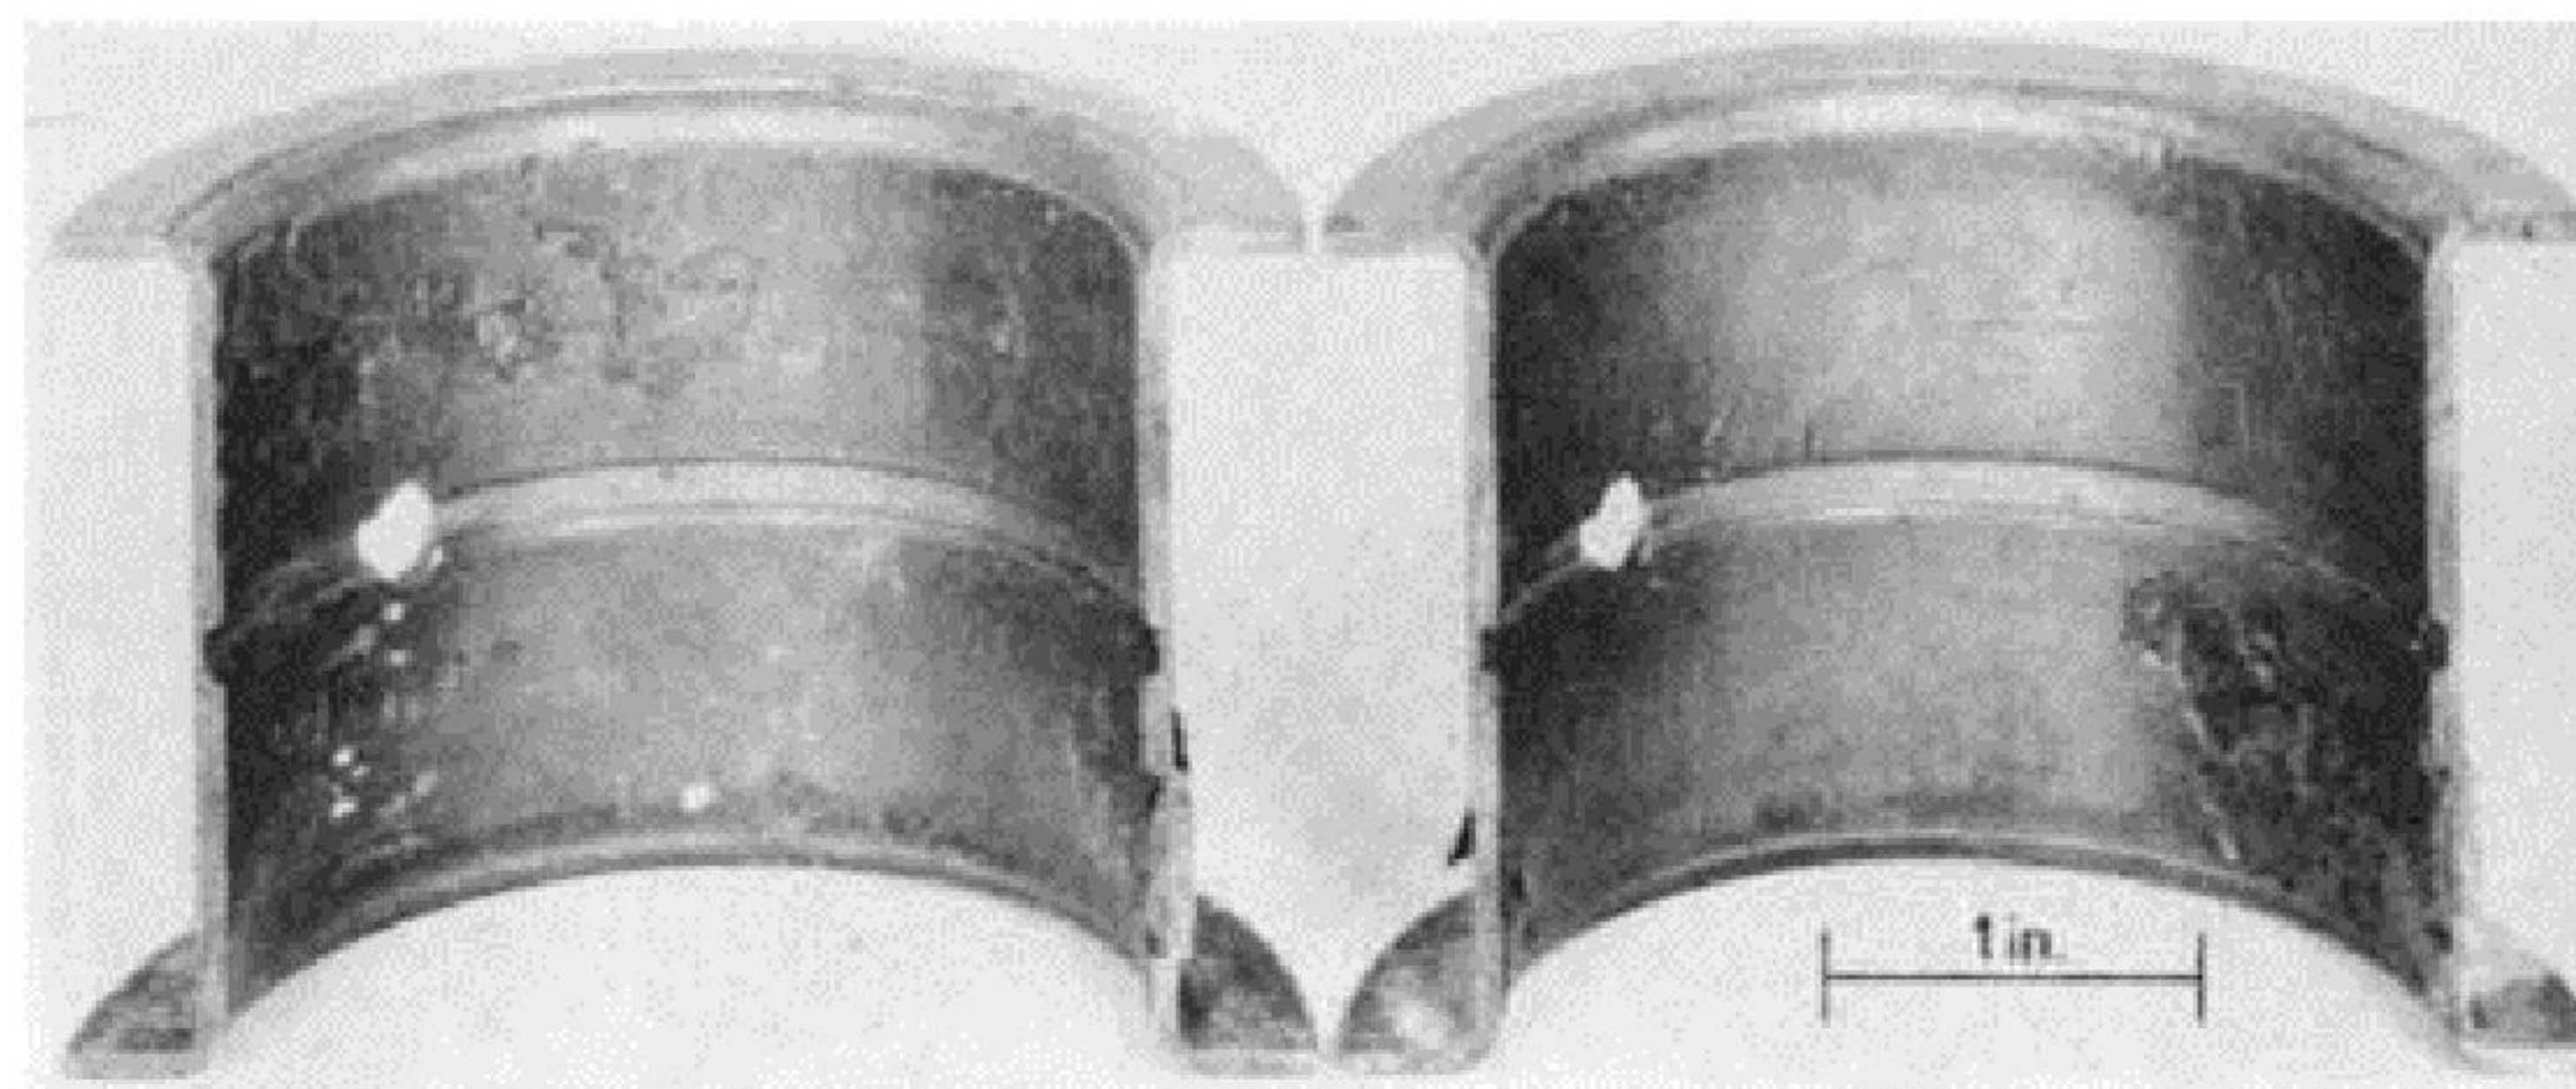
Fatigue caused by a shifted bearing cap.
